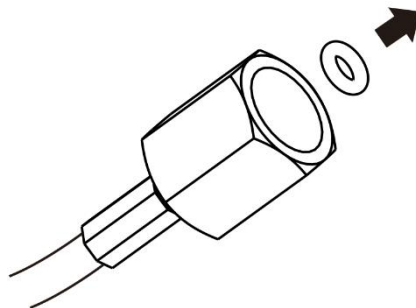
Replacing the sealing ring of a high-pressure connecting hose
